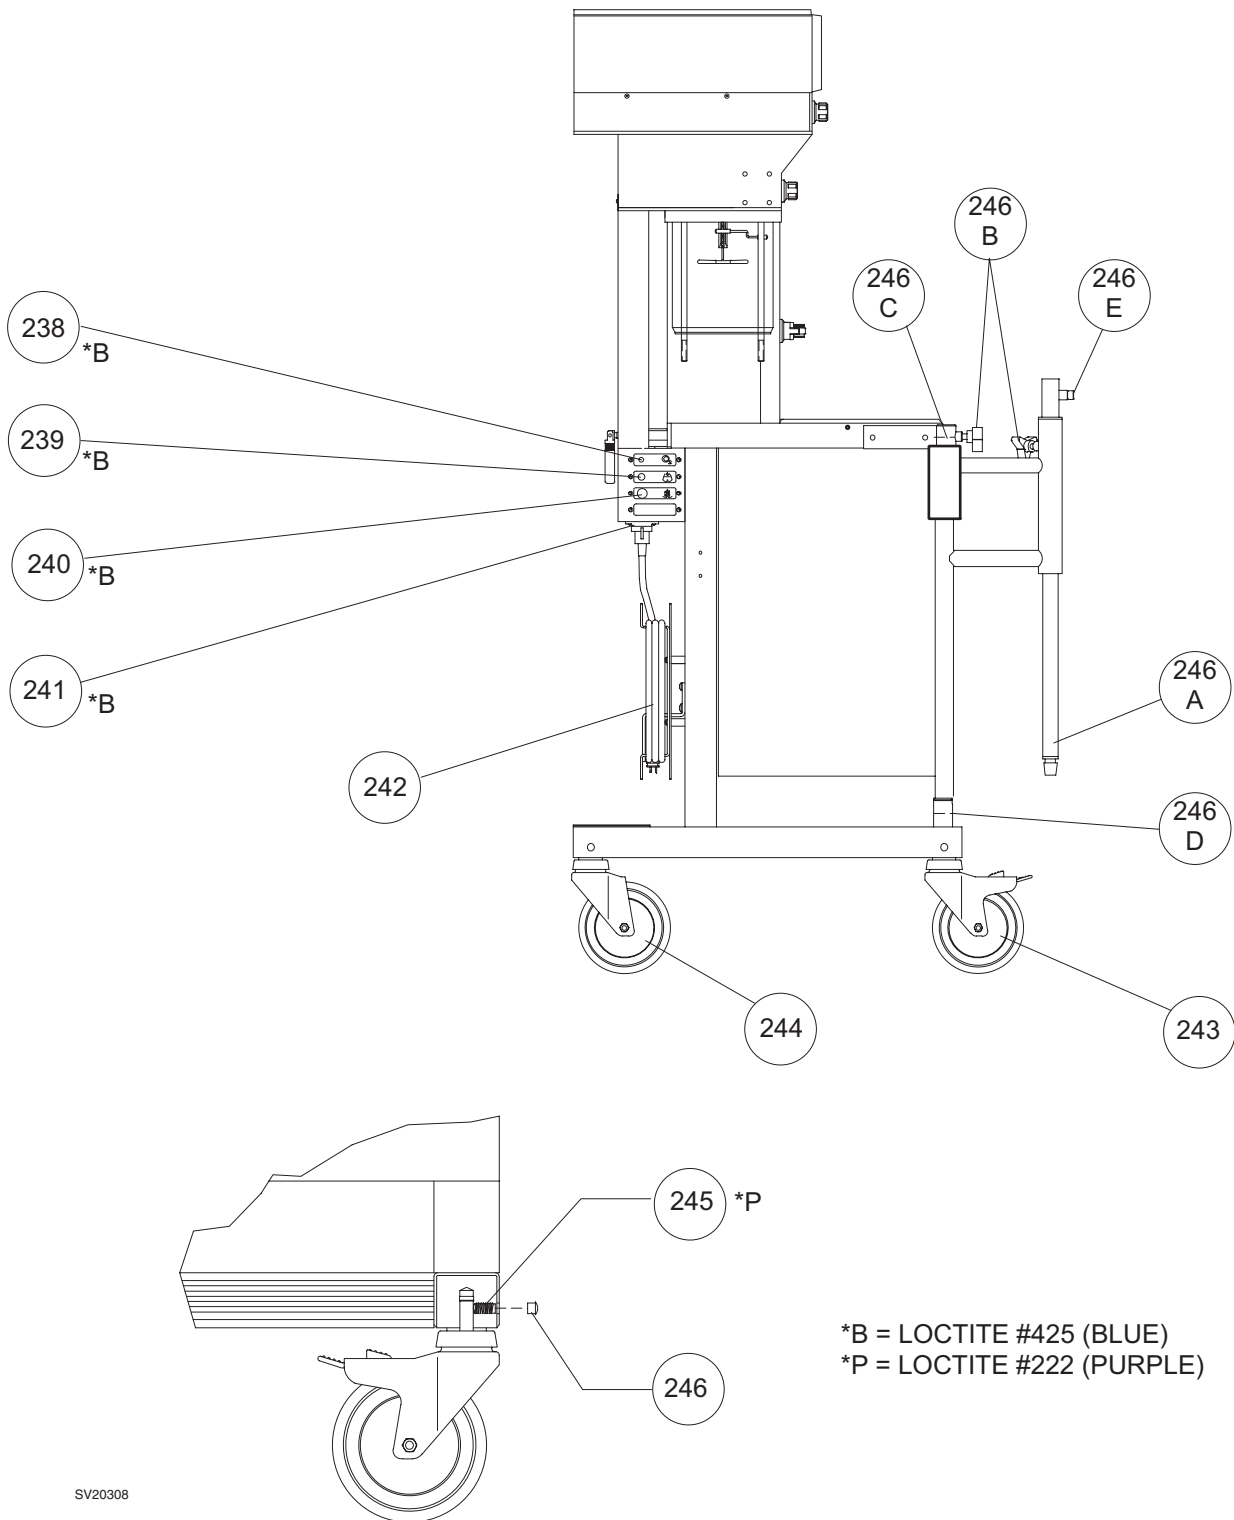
Sensor Interface Panel Asms., AC Power, Casters
